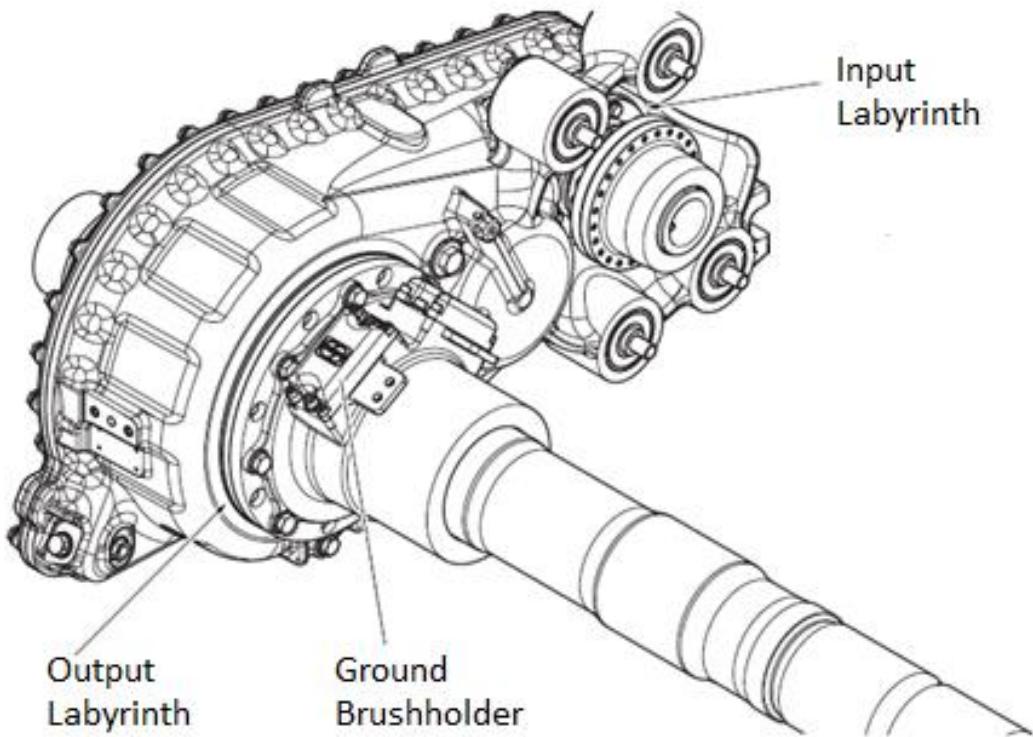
Gear Unit and Ground System with Axle Assembly
